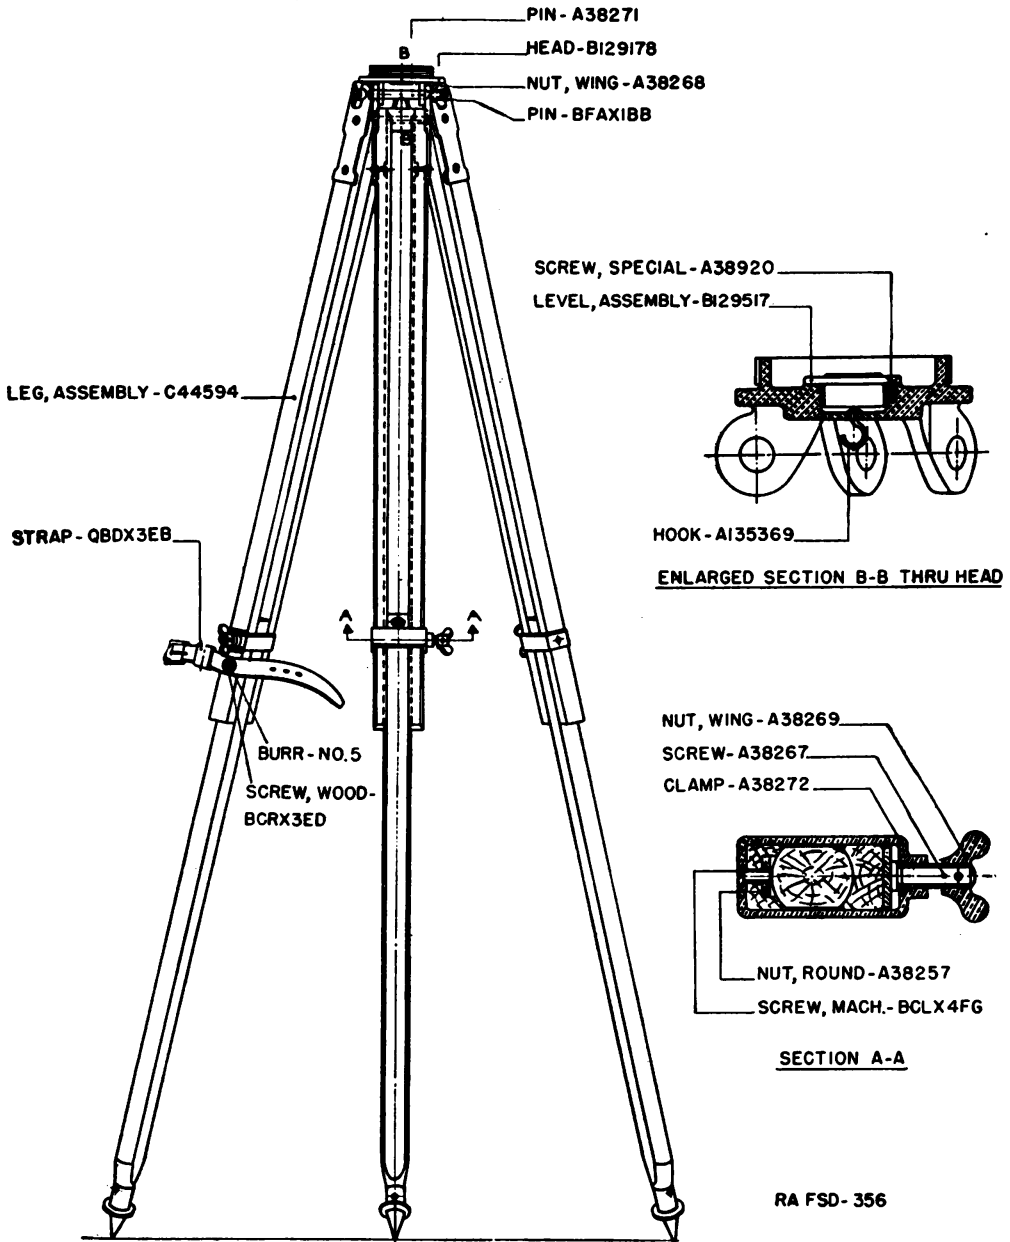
Tripod, type H, assembled and sectioned views.
